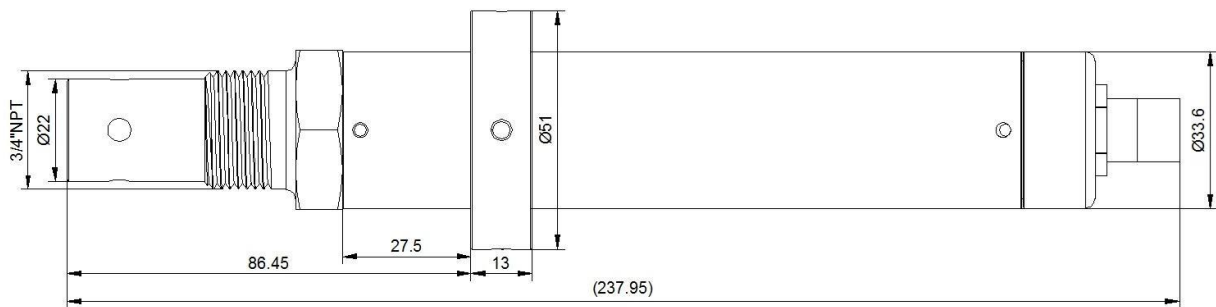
Dimension of the ST-724, ST-725 and ST-728 (mm)
